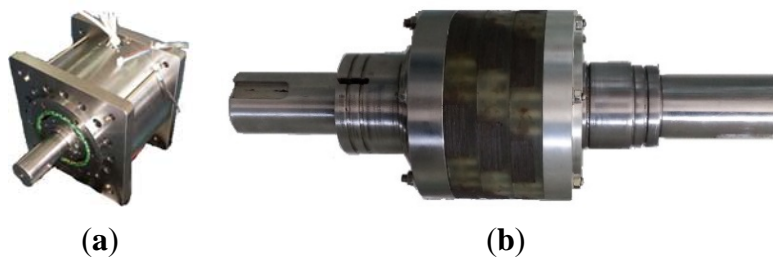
A prototype of the MGDRM: (a) Prototype; (b) Assembly of the inner and outer rotors.
